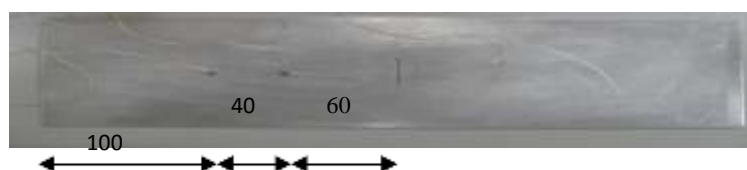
Placing of sender and receiver on the test plate (All dimensions are in mm)
